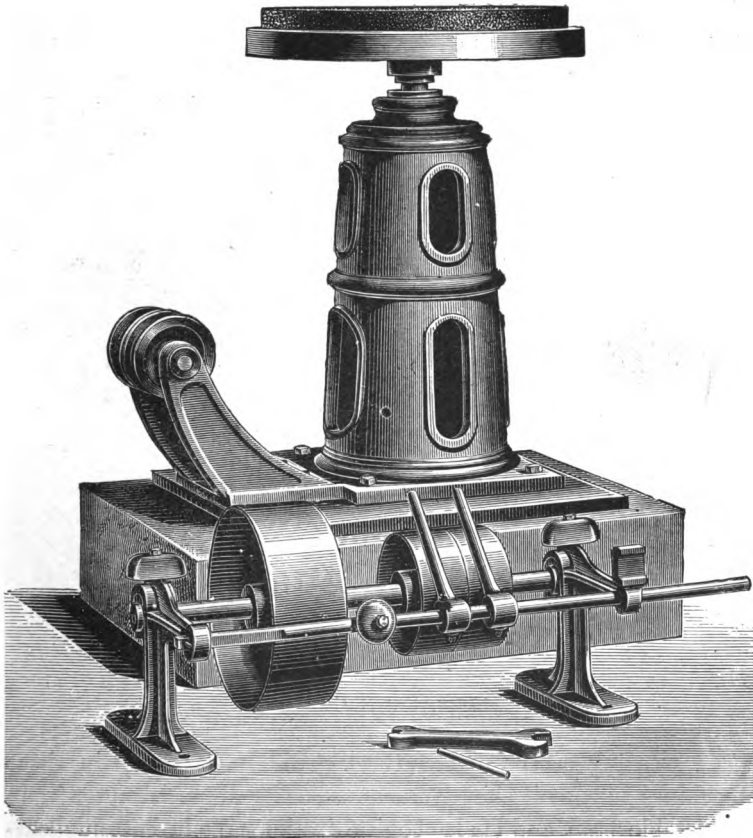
Horizontal Emery Grinding Machine. London Emery Works Company.
